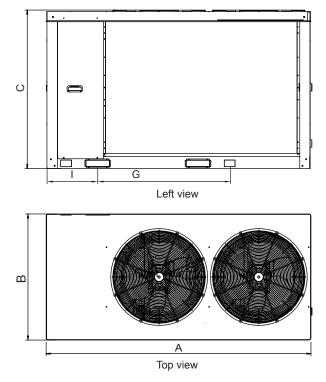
outline dimensional of HTW-MCSU60RN1L
